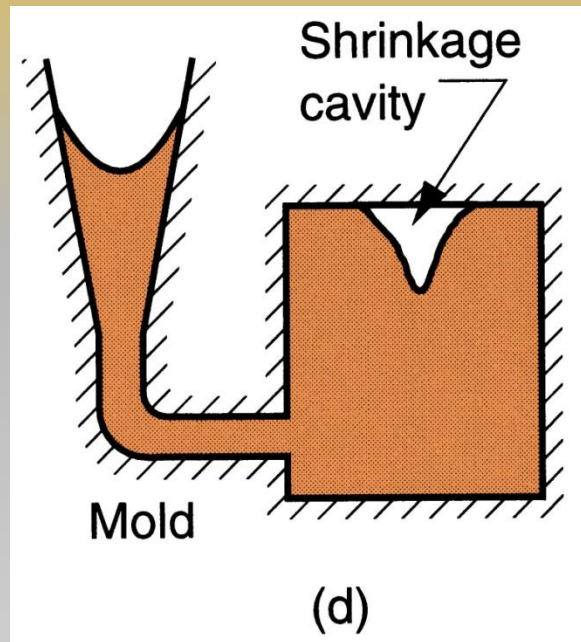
Some common defects in castings: (d) shrinkage cavity
